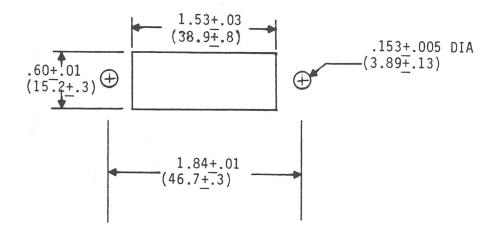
Panel Mounting the MVME300A Cable Connector
